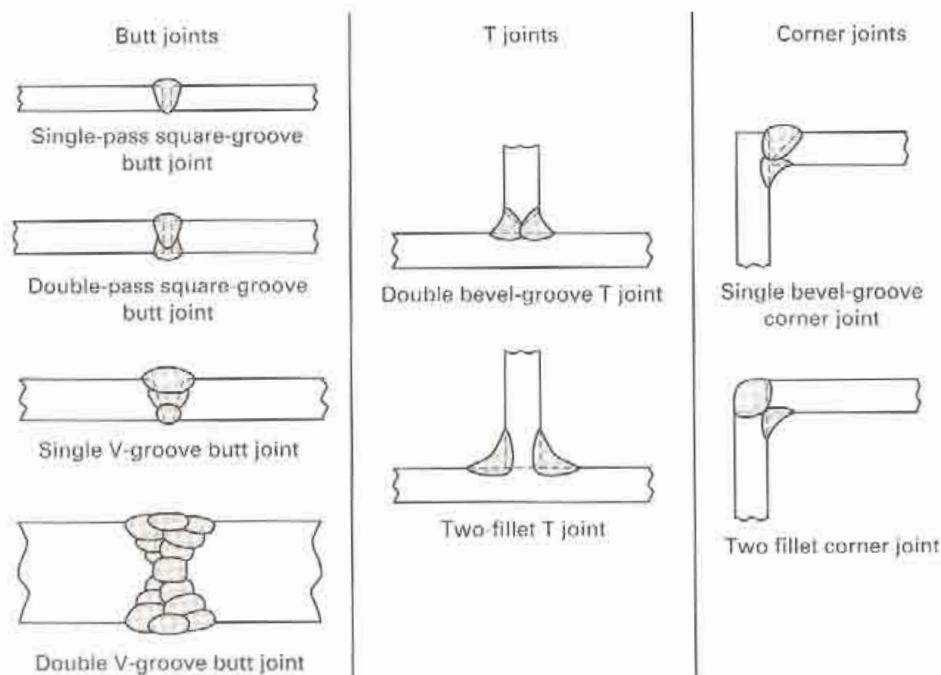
Various weld procedures used to produce welded joints. (Courtesy Republic Steel Corporation, Youngstown, OH).
